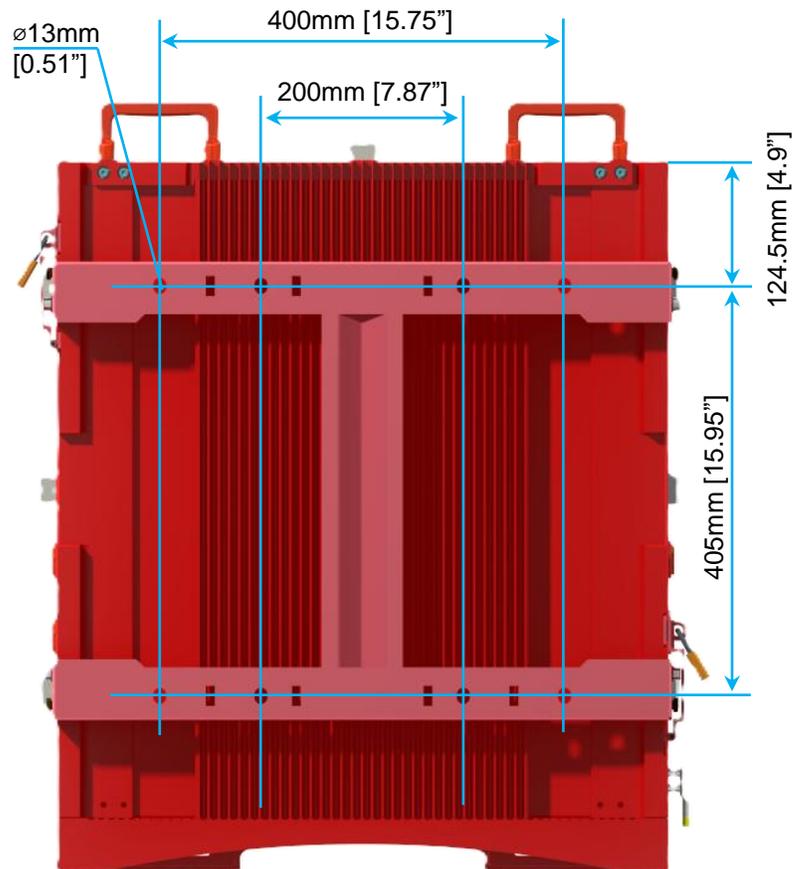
V3 BDA/MU/RU Mounting Bracket Dimensions
